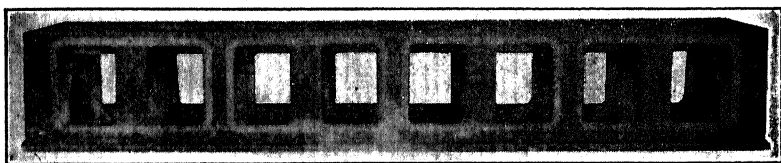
An aluminum Diesel engine bed repaired by arc welding, saving approximately \$1,100.00
